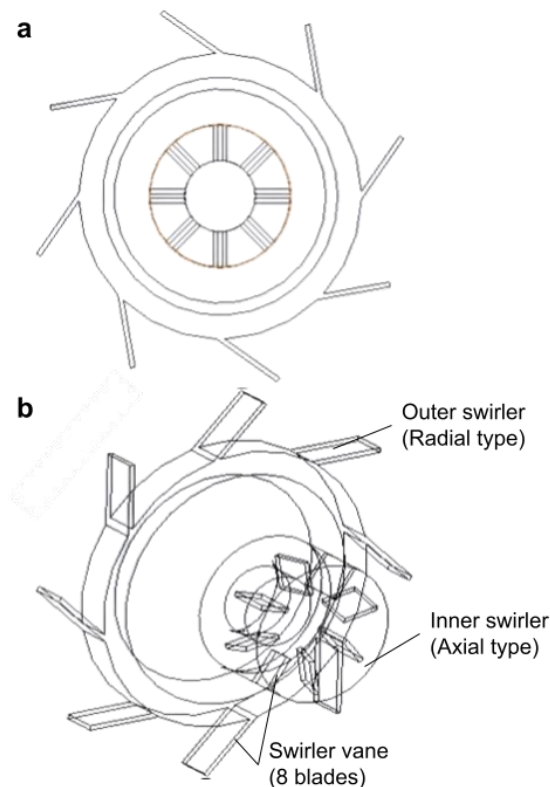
Axial-radial combined swirler (a) top view (b) isometric view
